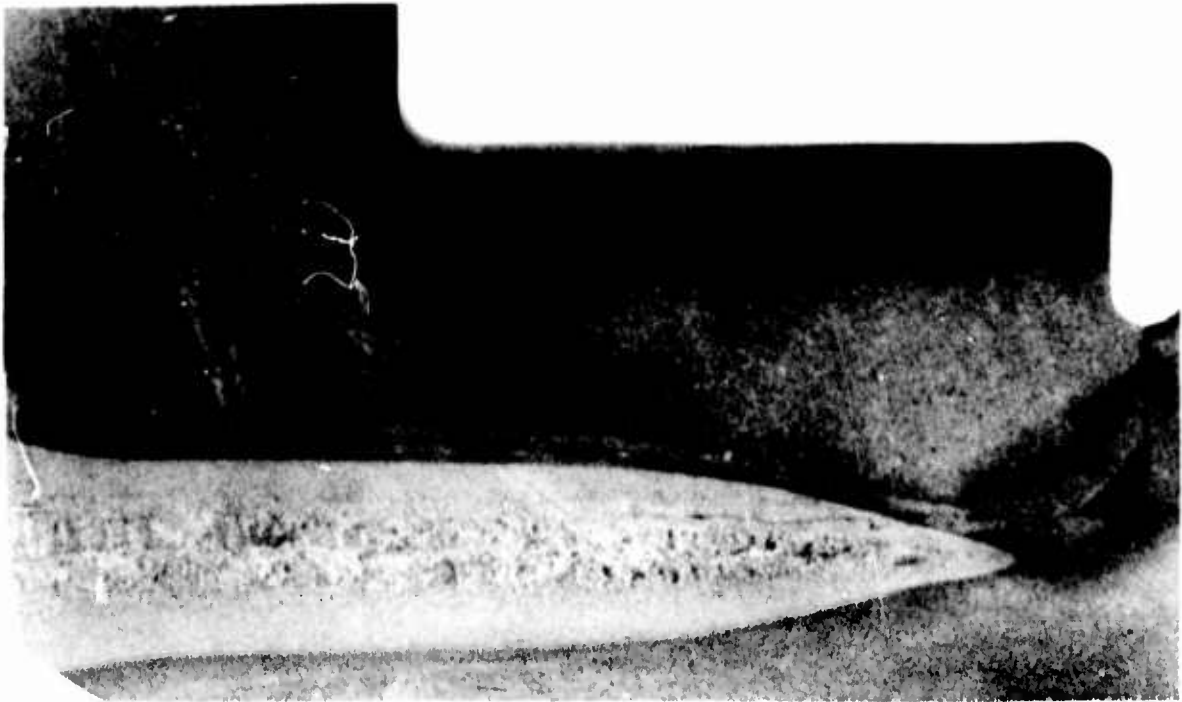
Electron Beam Weld - First-Row Pinion.
